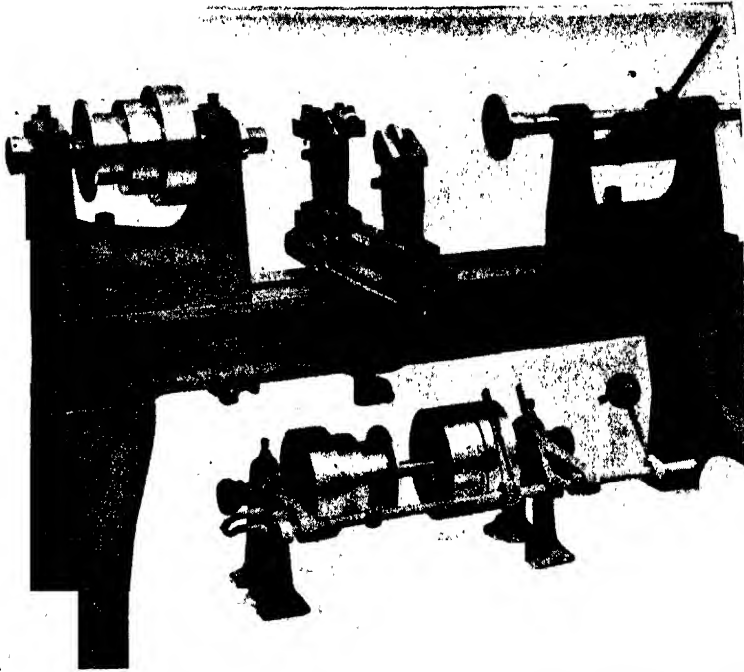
SPINNING LATHE ADAPTED FOR TRIMMING AND BEADING WITH LEVER-OPERATED SLIDE
